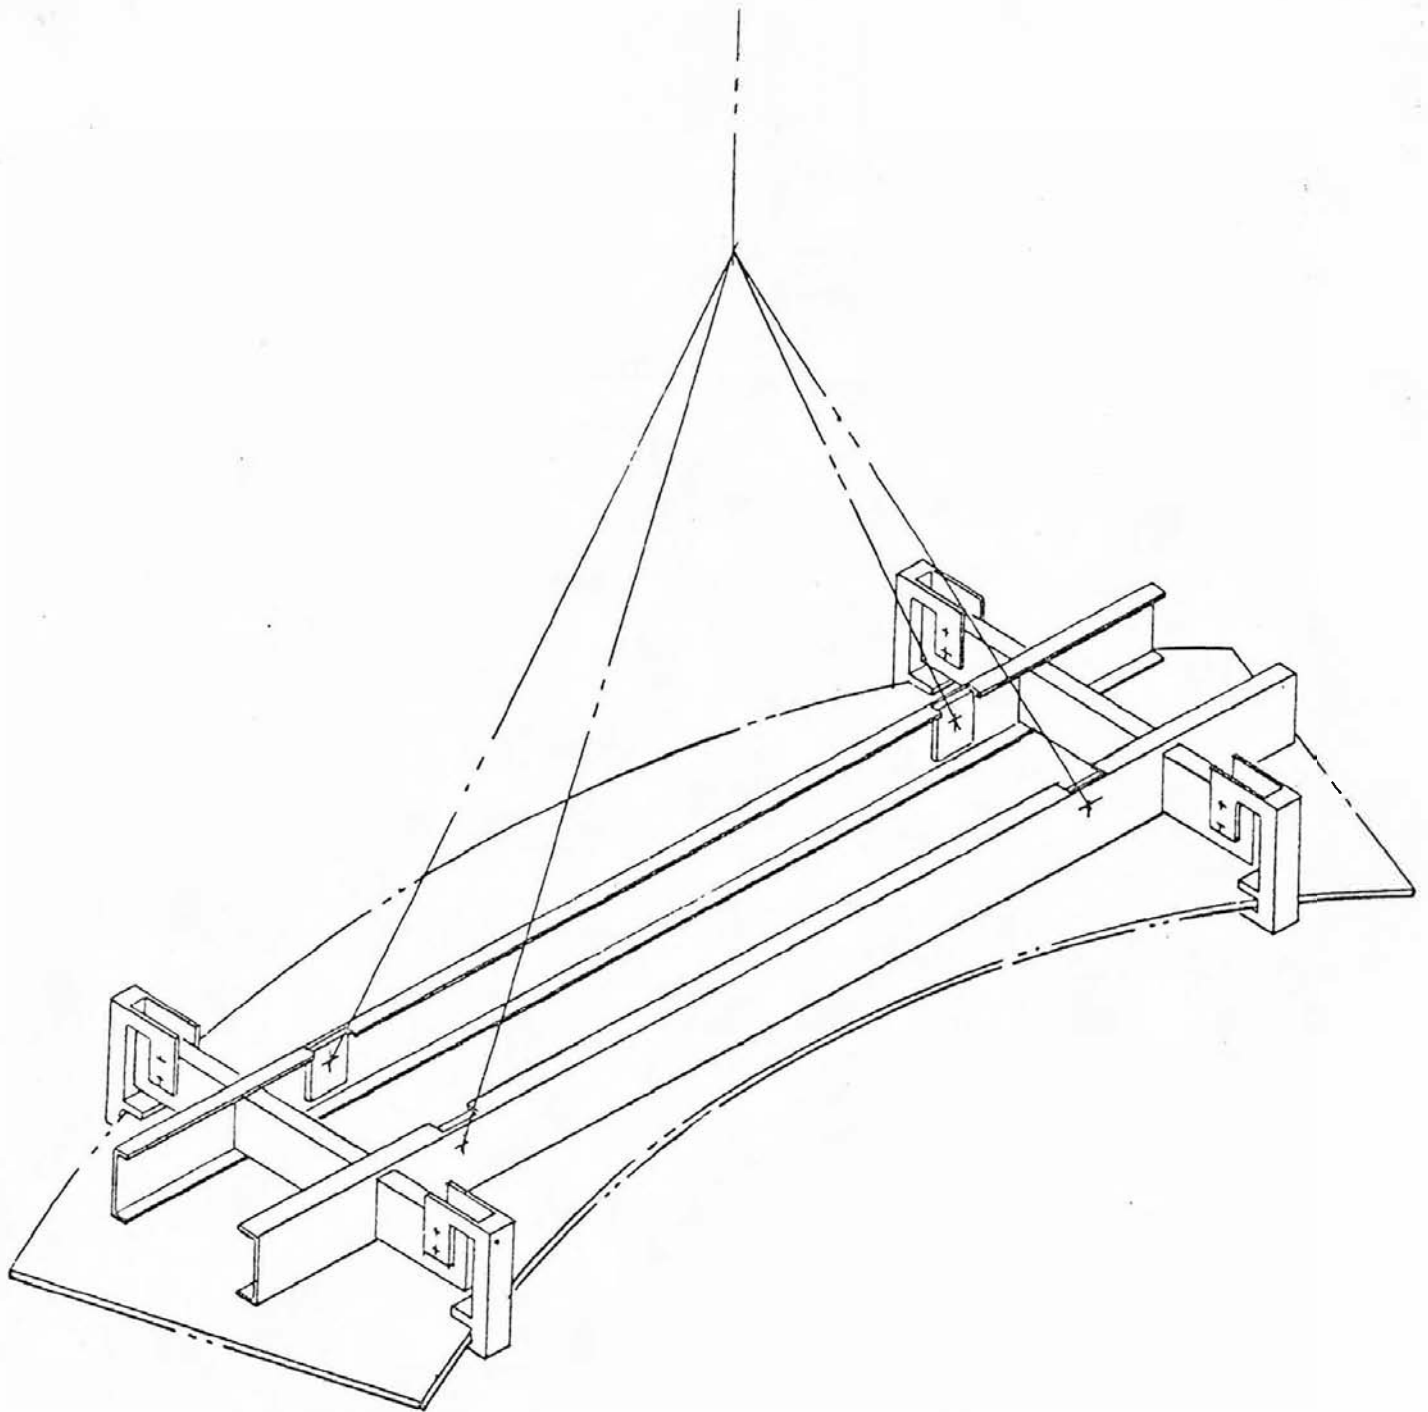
Upper and Lower Thrust Ring Web Assemblies Hoisting Tool HT-370-18703
